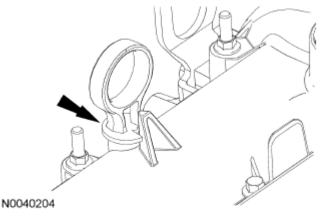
Locating Oil Level Indicator Courtesy of FORD MOTOR CO.
